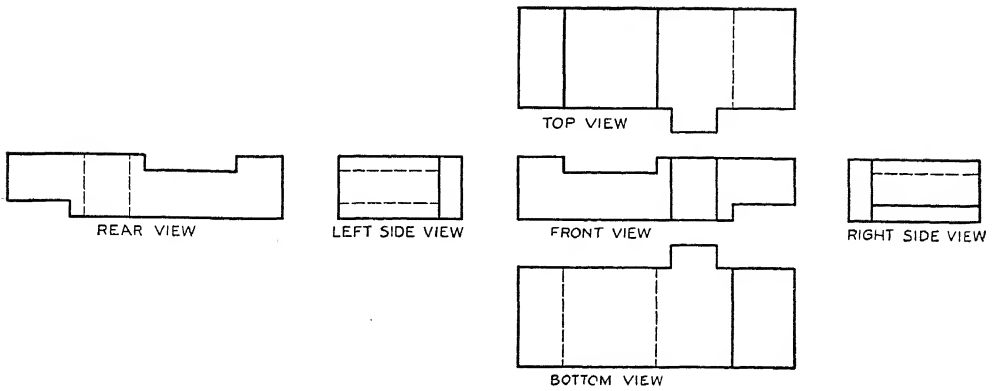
Arrangement of Views. (*American Standard.*)
